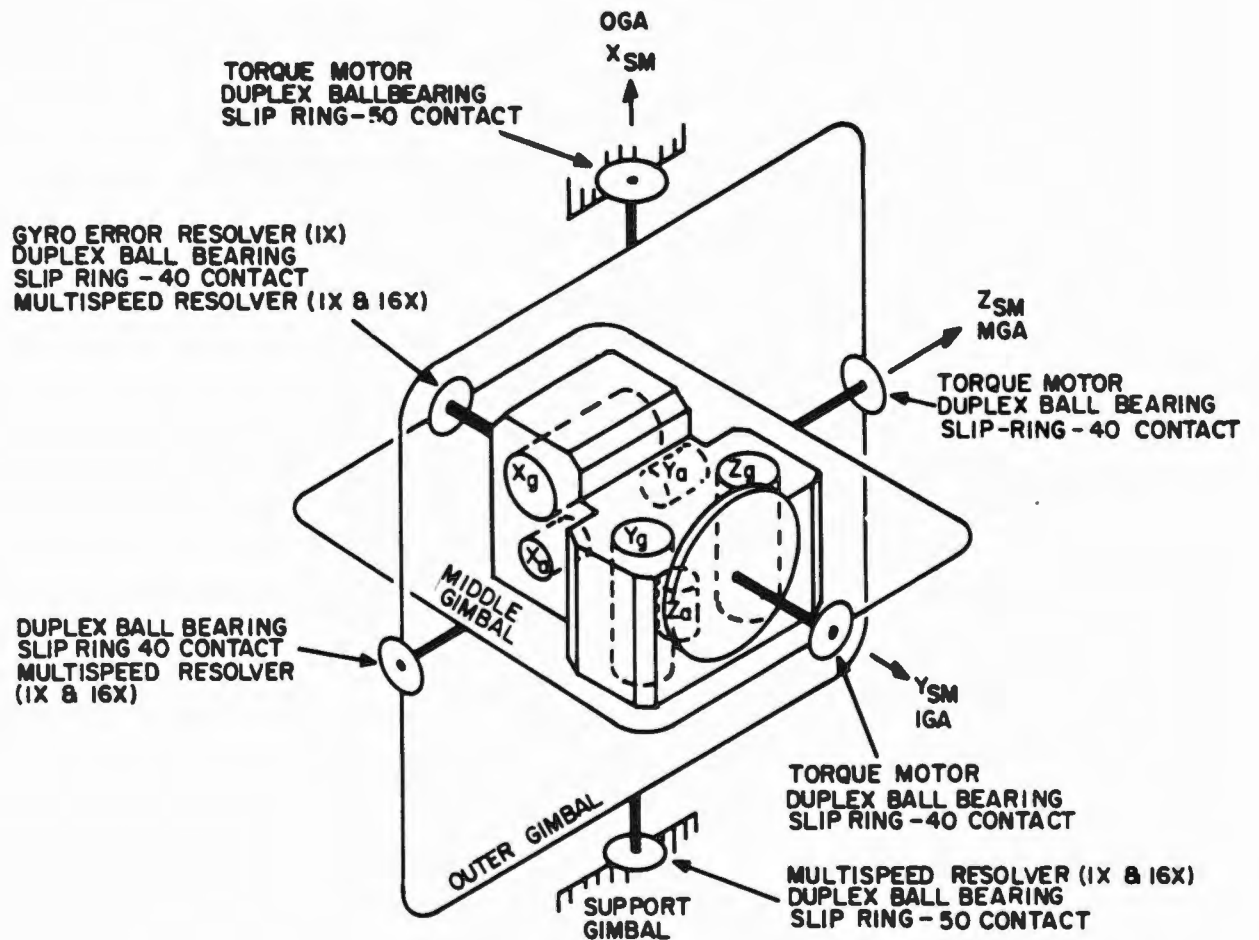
IMU gimbal assembly and gimbal axes.
